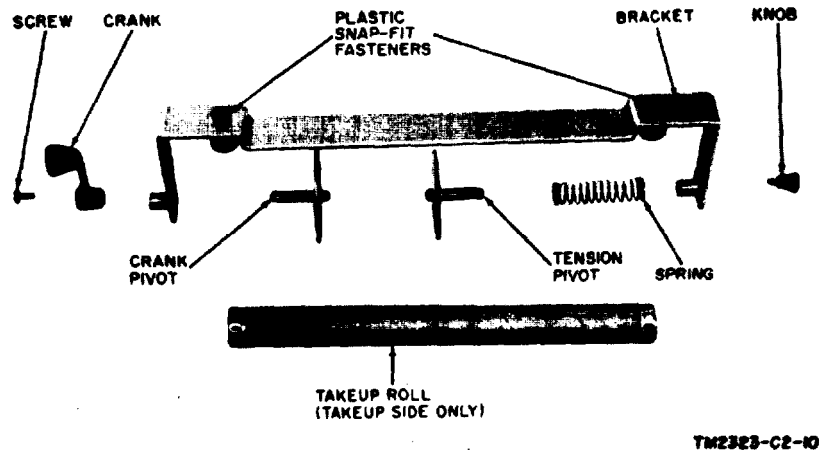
Roil attachment disassembled, PH-637B/PFP. (Added)
